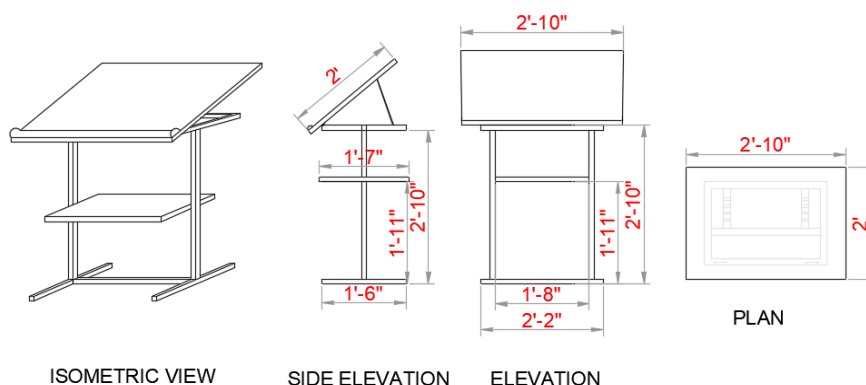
Drafting Table Type A — Dimension study (plan, front elevation, side elevation).
